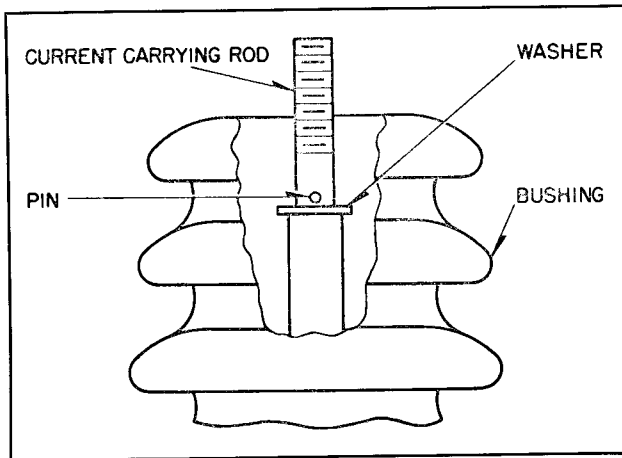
Correct Positioning of Pin and Washer in Bushing Assembly
